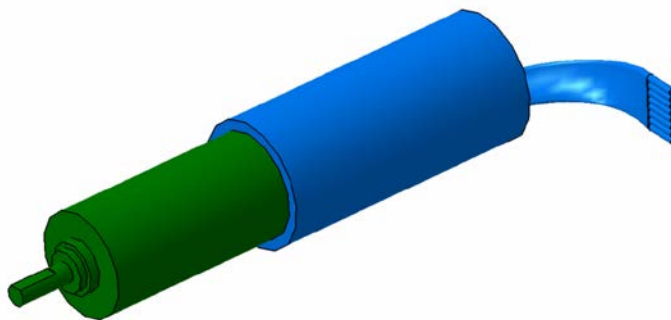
Motor 1226 12b combined with 10/1 gearbox
